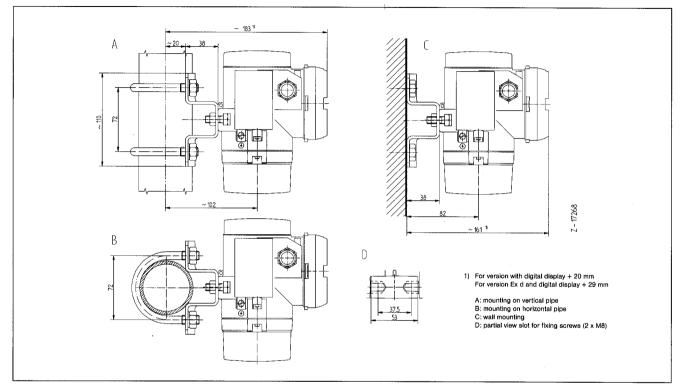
Possible mounting positions with fixing brackets A bracket with pipe mounting (internal dia. Ø 2") C fixing brackets (hole diam. Ø 11 mm)
